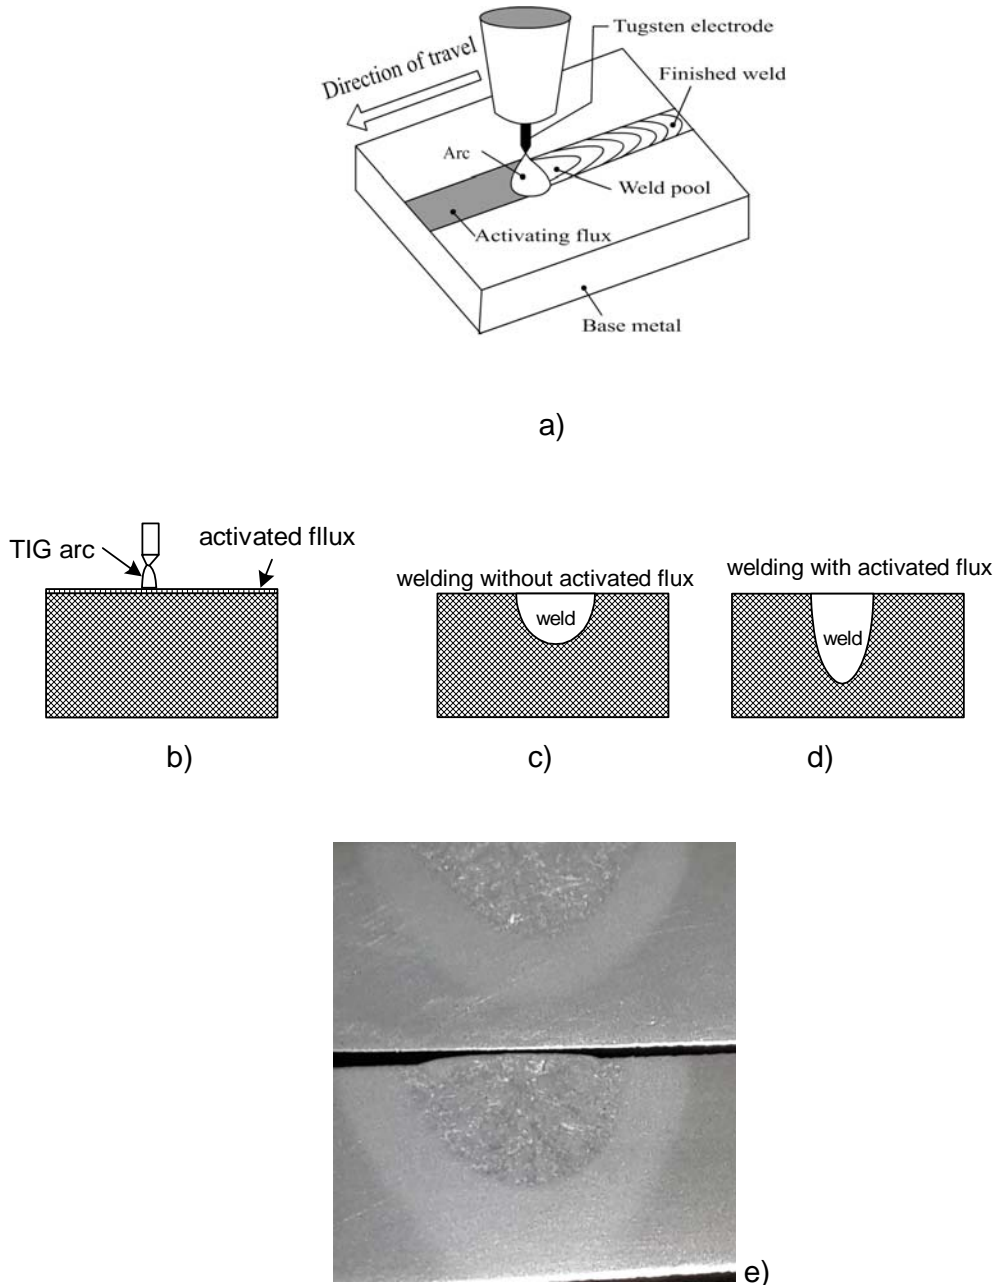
Schematic of activated flux TIG welding: a) method of applying flux, b) application of flux and arc, c) weld bead geometry without activated flux and d) weld
